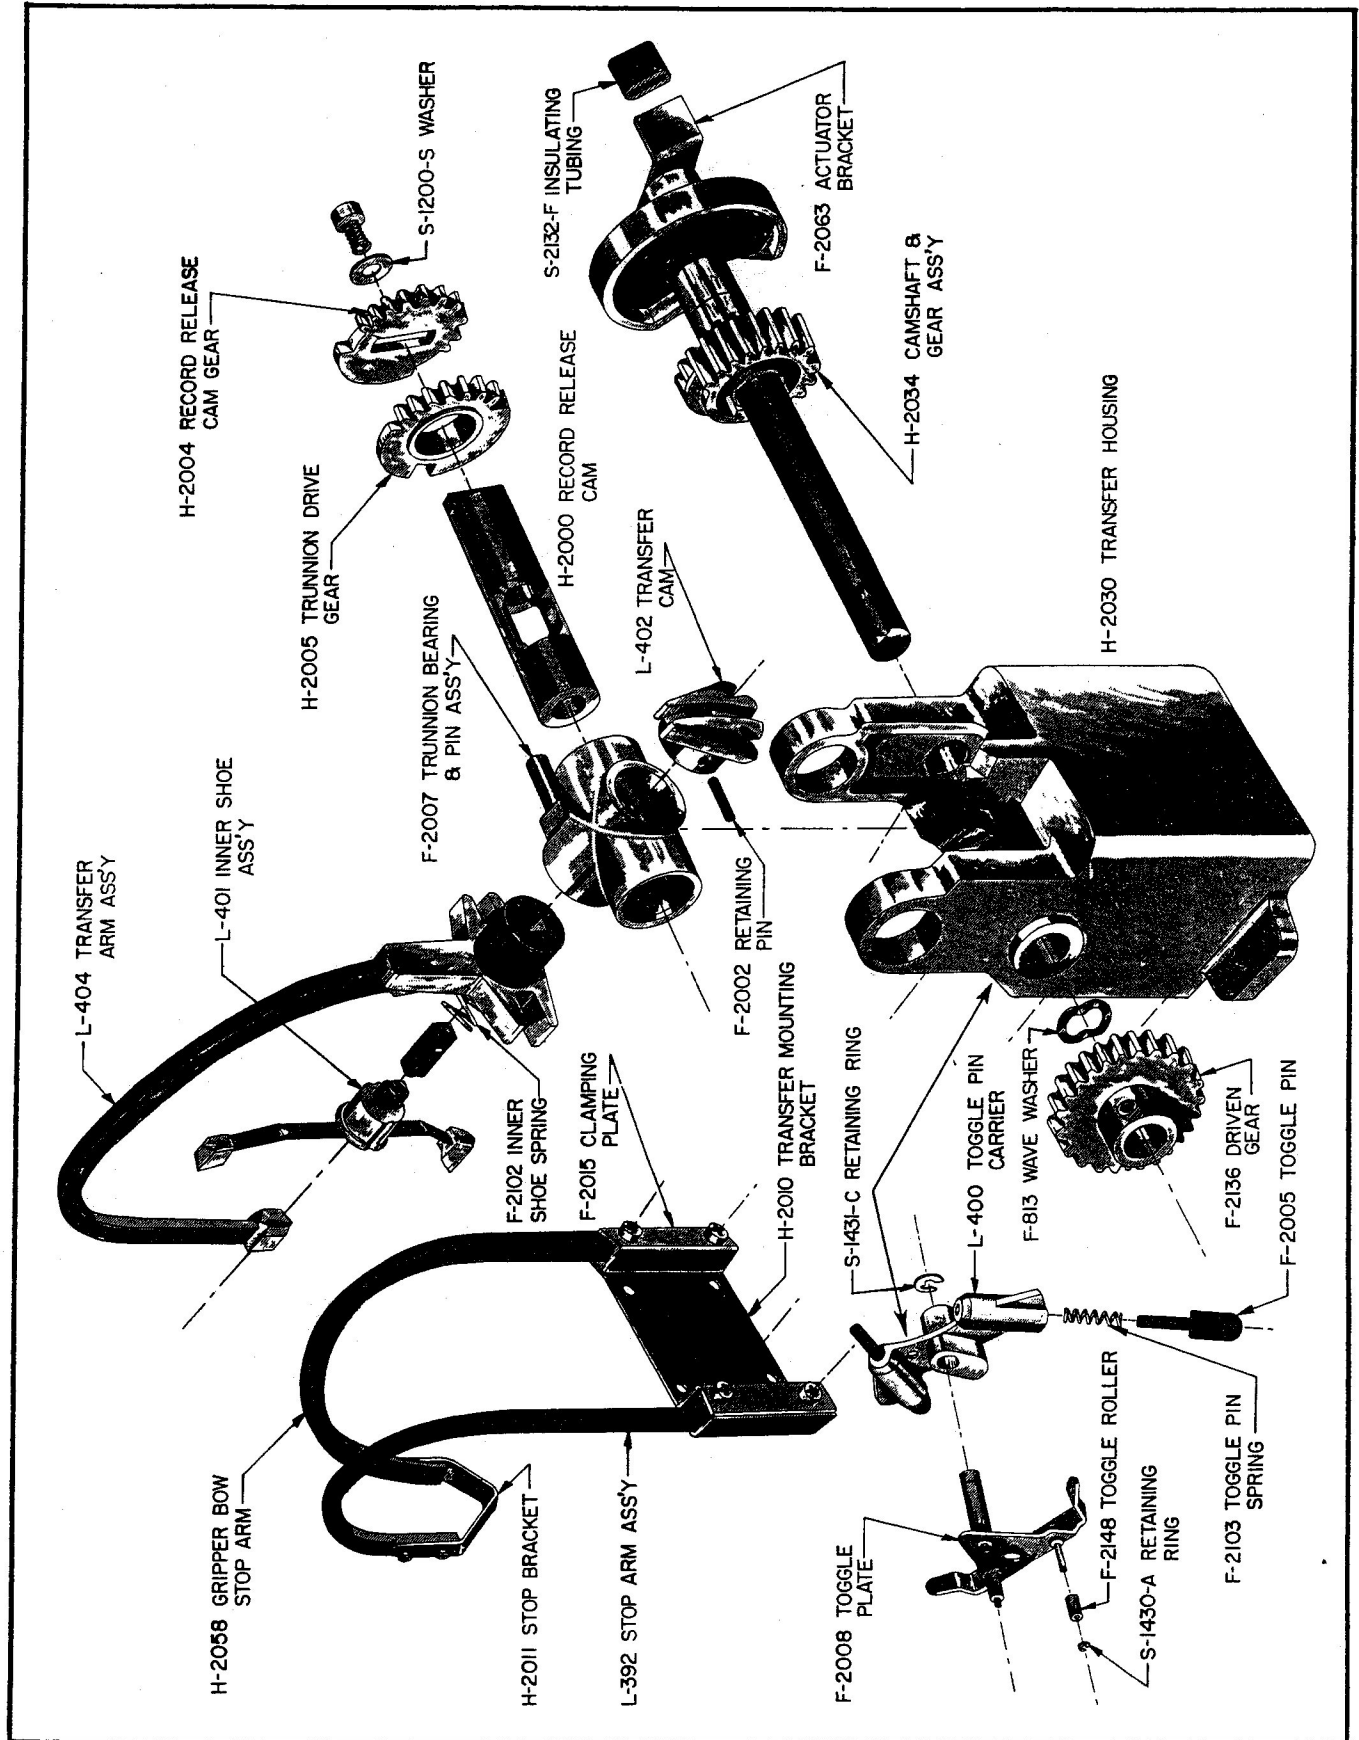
TRANSFER ASSEMBLY PARTS GROUP
